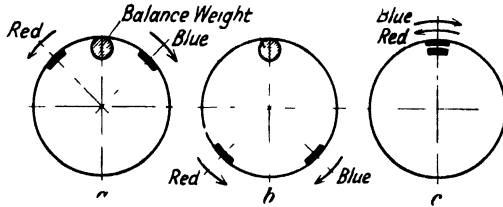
FIXING THE POSITION FOR THE BALANCING WEIGHT
